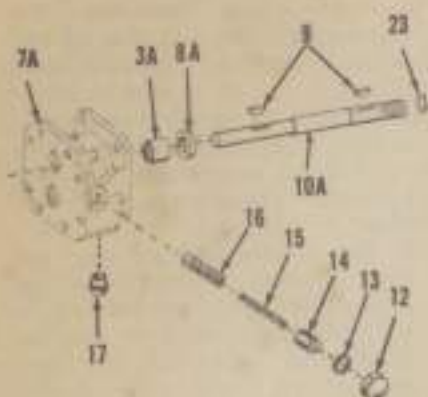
After diesel tractor Serial No. D17-38963, a Barnes pump similar to that shown in Fig. 19, except for drive end parts shown above, is used alternately with a Webster pump.
